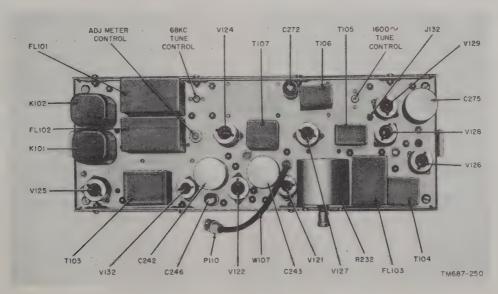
Receiver base-band amplifier plug-in assembly, top view.
